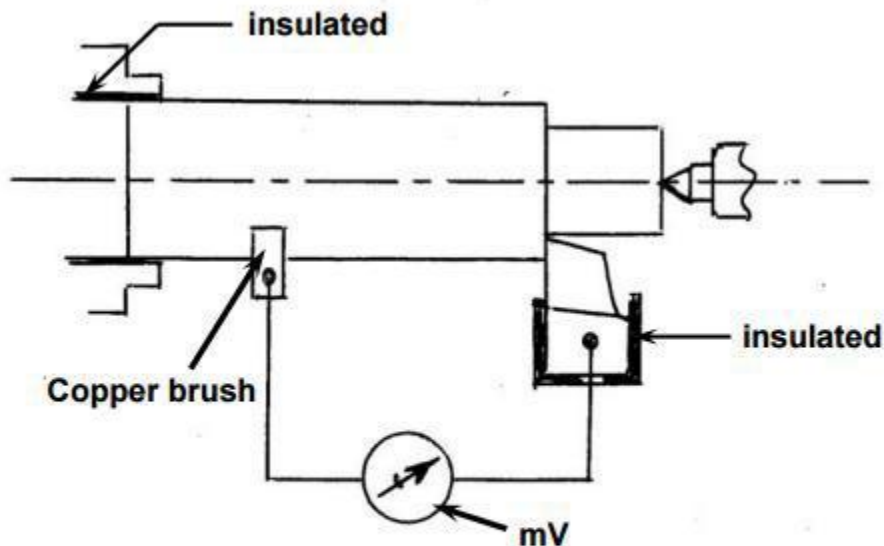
Tool-work thermocouple technique of measuring cutting temperature.
